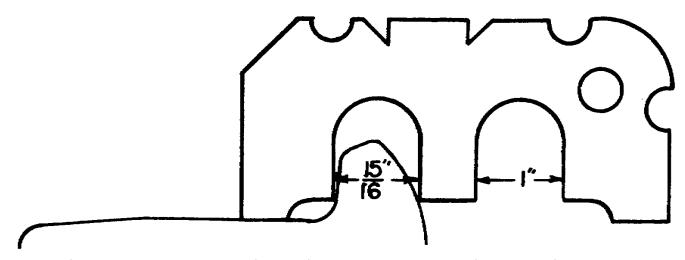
Wheel Having Thin Flange Defects With Gage in Place.
